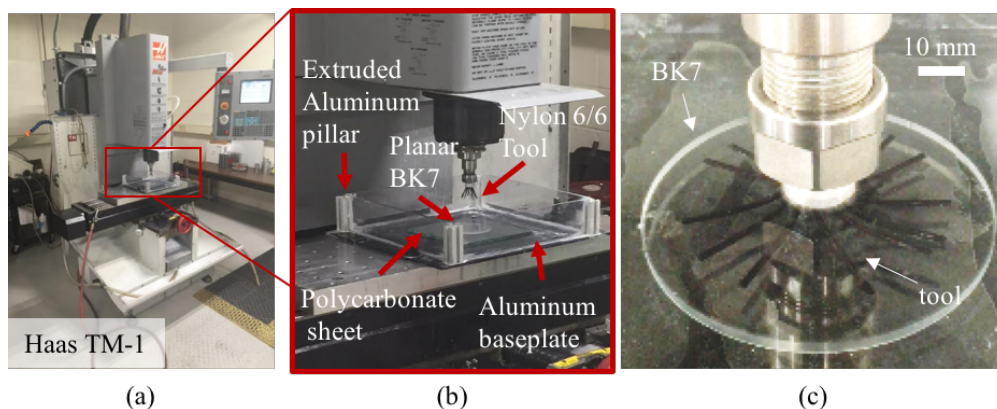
3-axis CNC setup; (a) Haas TM-1 machine tool, (b) test setup close-up (c) twelve fiber Nylon 6/6 tool engaged with planar workpiece
